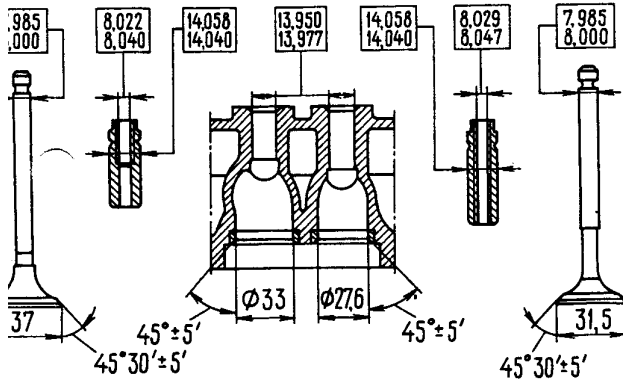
Basic Dimensions of Cylinder Head, Valves and Valve Guides
